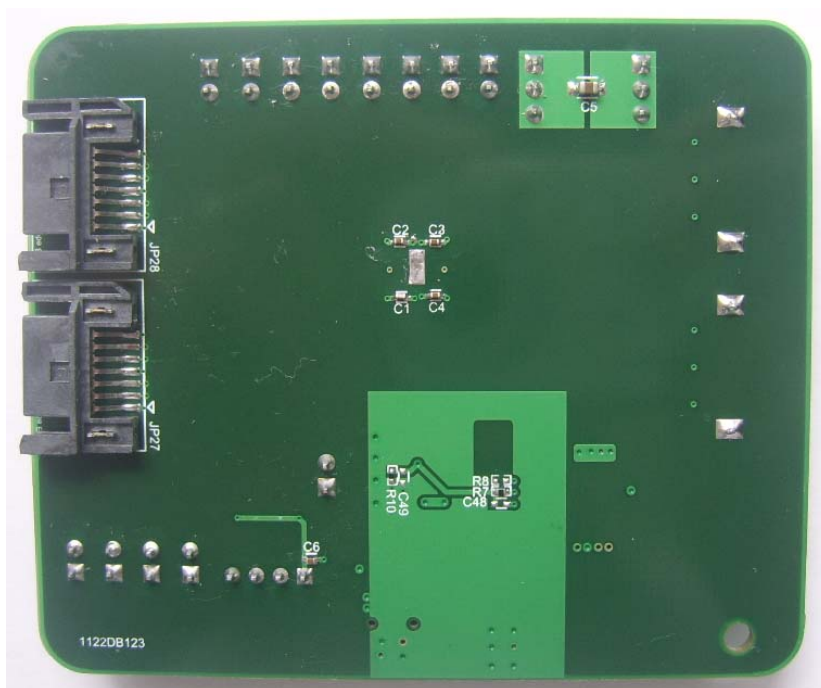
Bottom view of PI2EQX6812ZHE Eval board Rev.A
